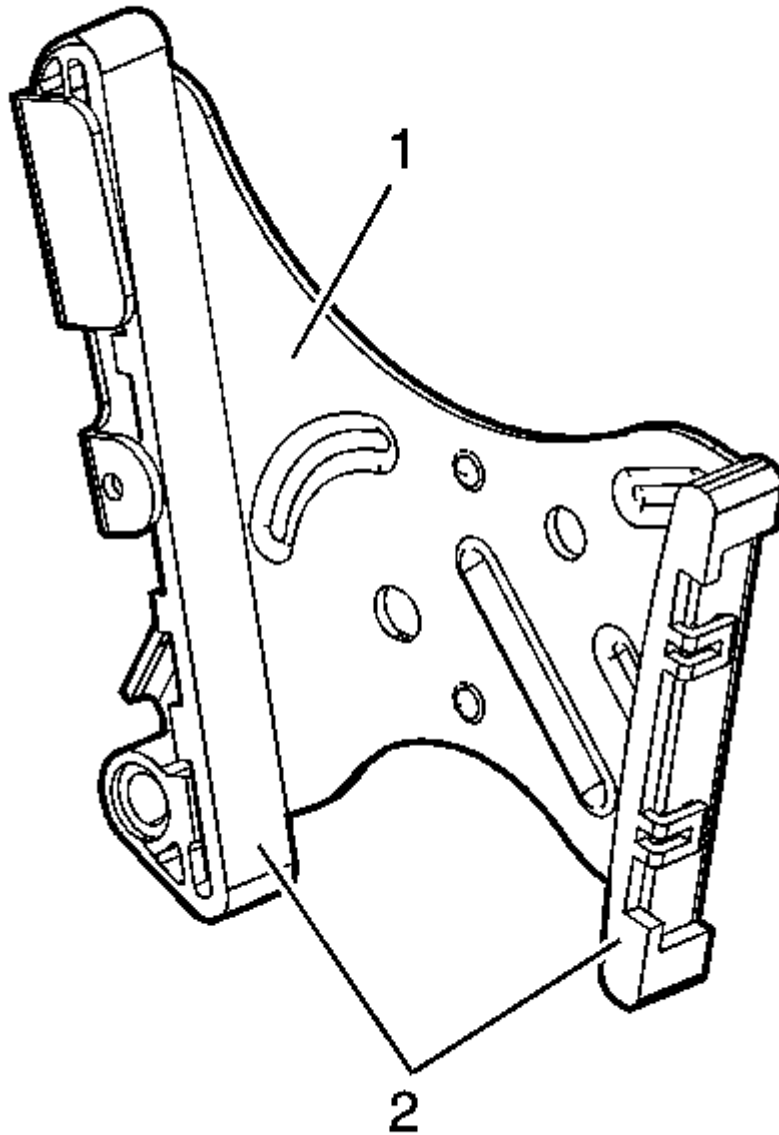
Identifying Damaged Timing Chain Tensioner & Chain Tensioner Slides
